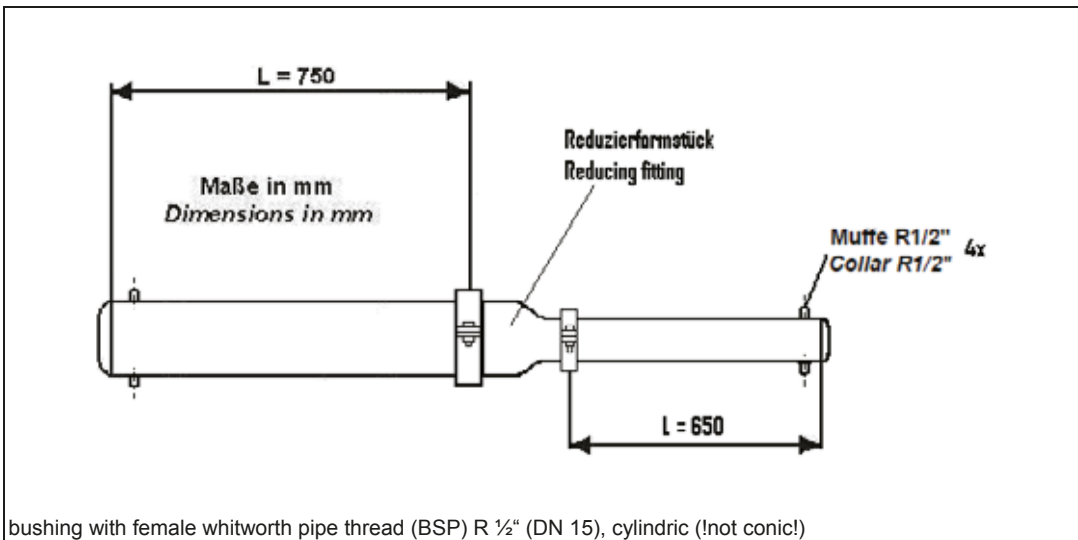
Test sample assembly for pipe fittings – reducing fitting
